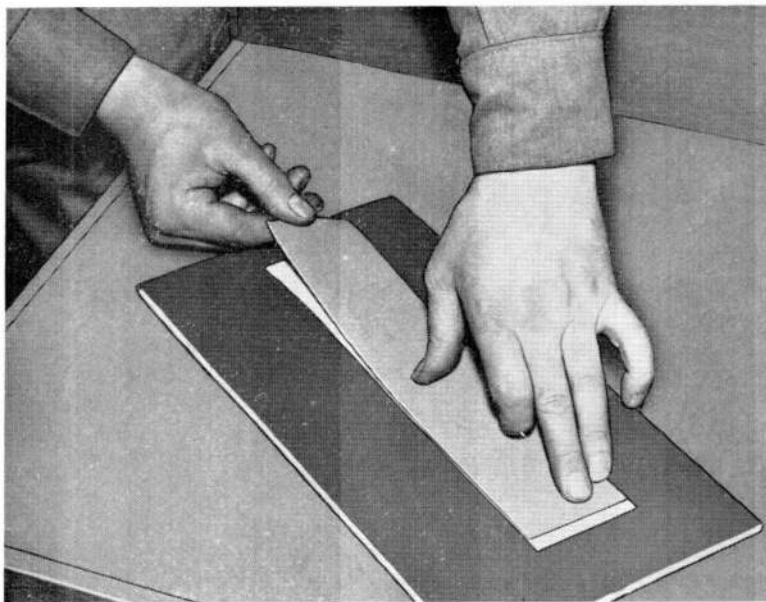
Affixing abrasive strip to adhesive tissue tape
